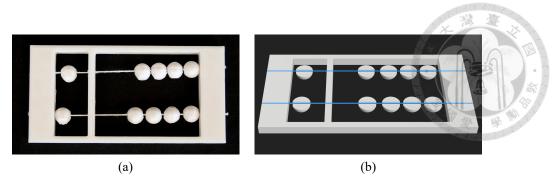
(a) Abacus printed with free-sliding beads. (b) Cutaway view of embedded fiber design.
